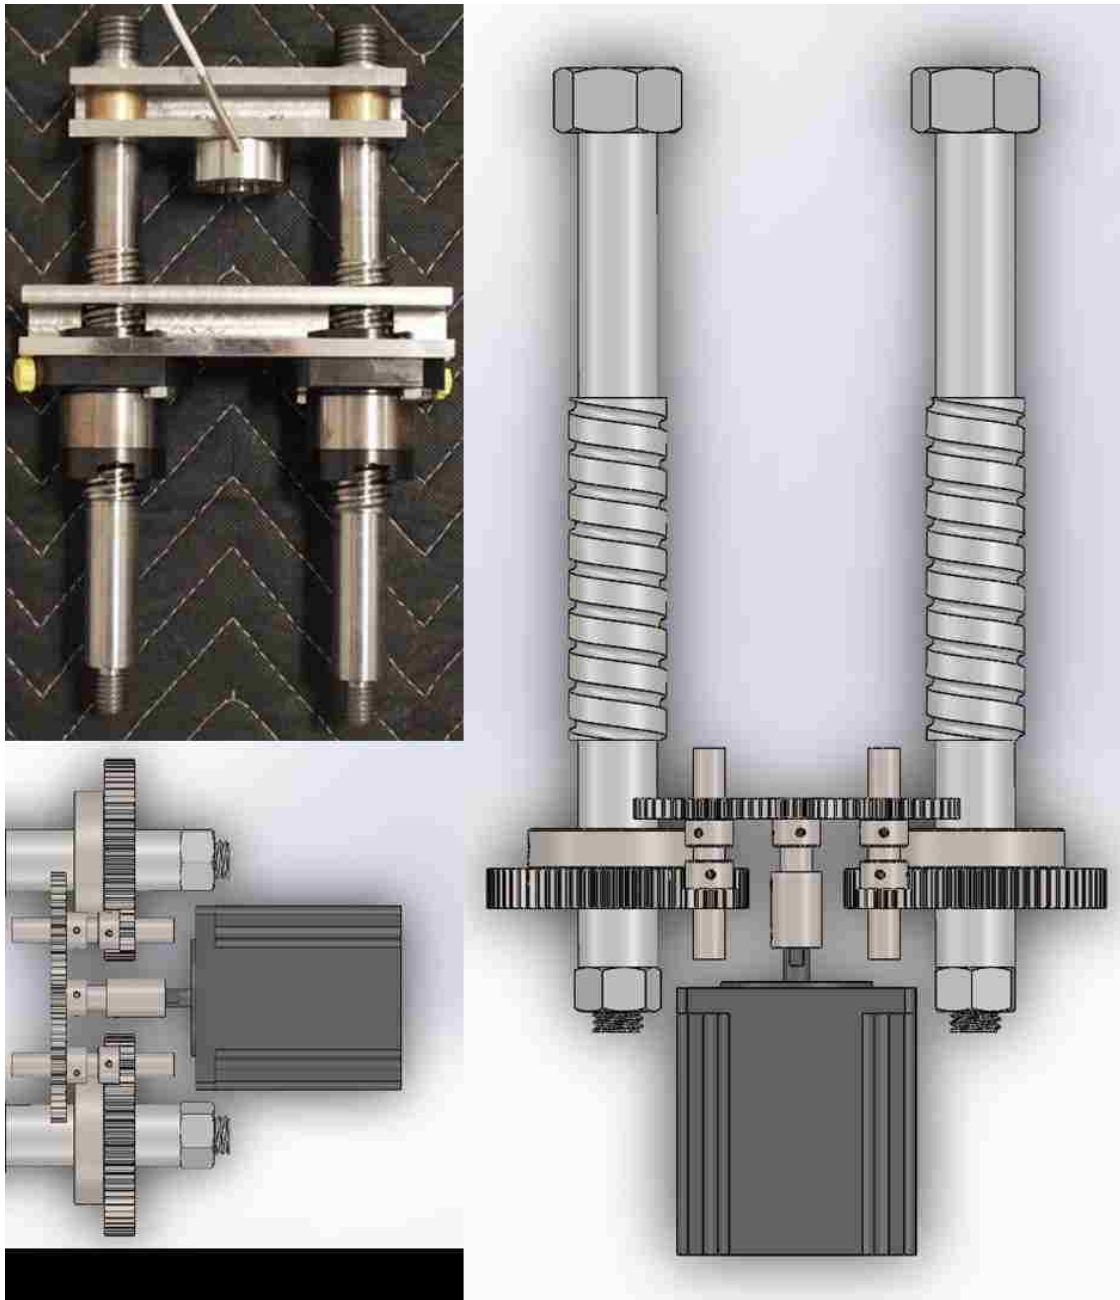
Compression fixture load system: Ball screws, load crosshead, support crosshead, gears, and stepper motor.
